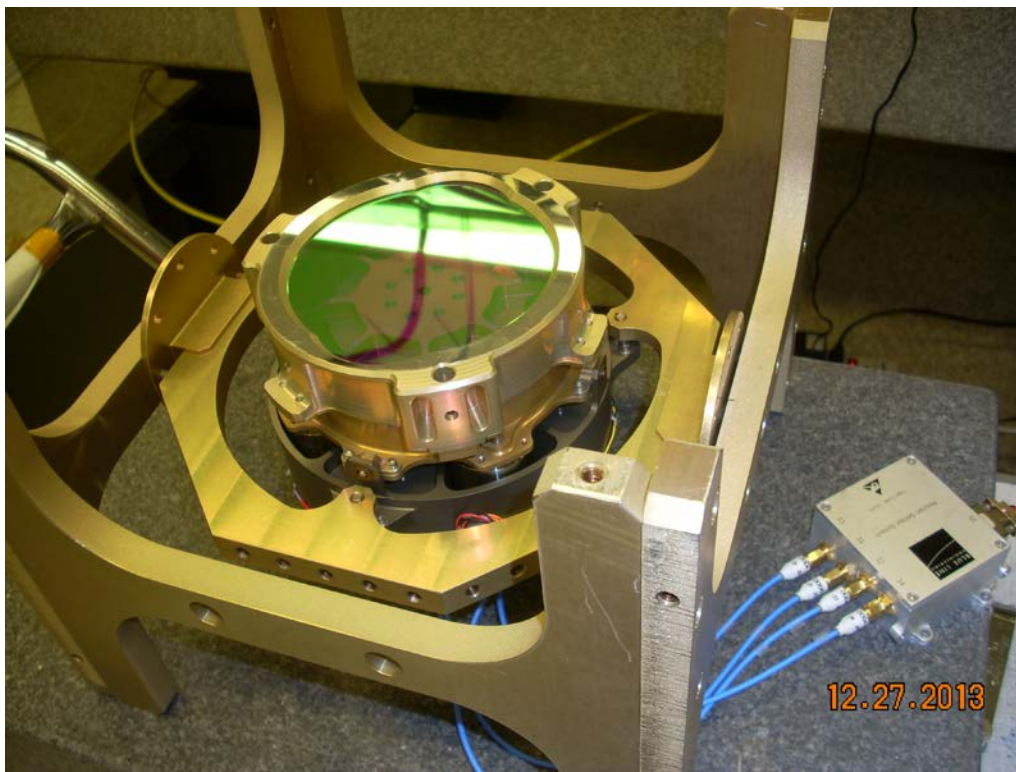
BSM Flight Model Mounted in the 6-Axis Balancing Fixture
